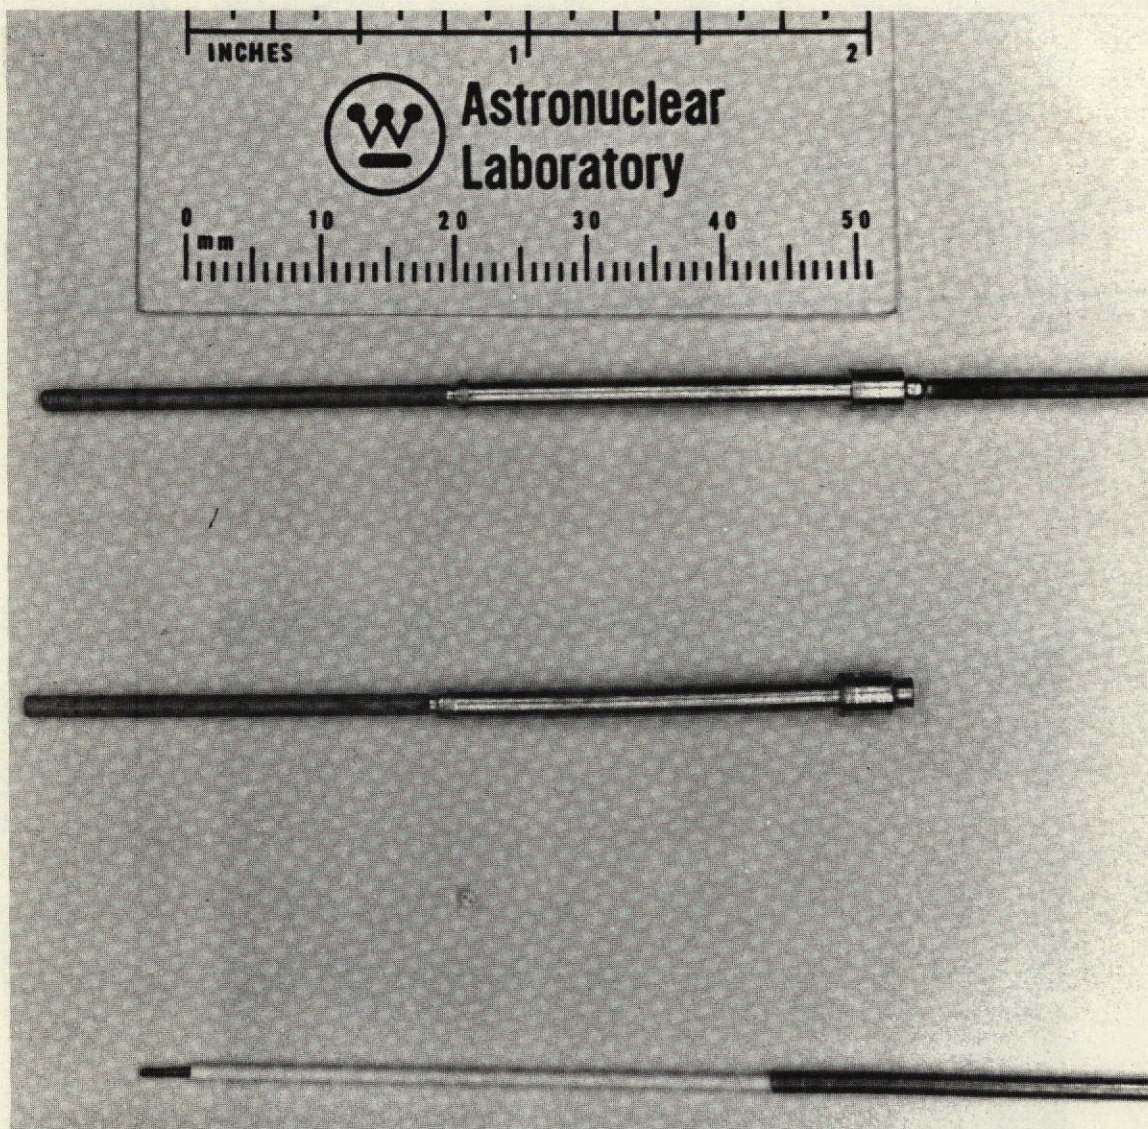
Thermocouple Subassembly Showing Attachment of Thermocouple Well to Sheath by EB Welding
